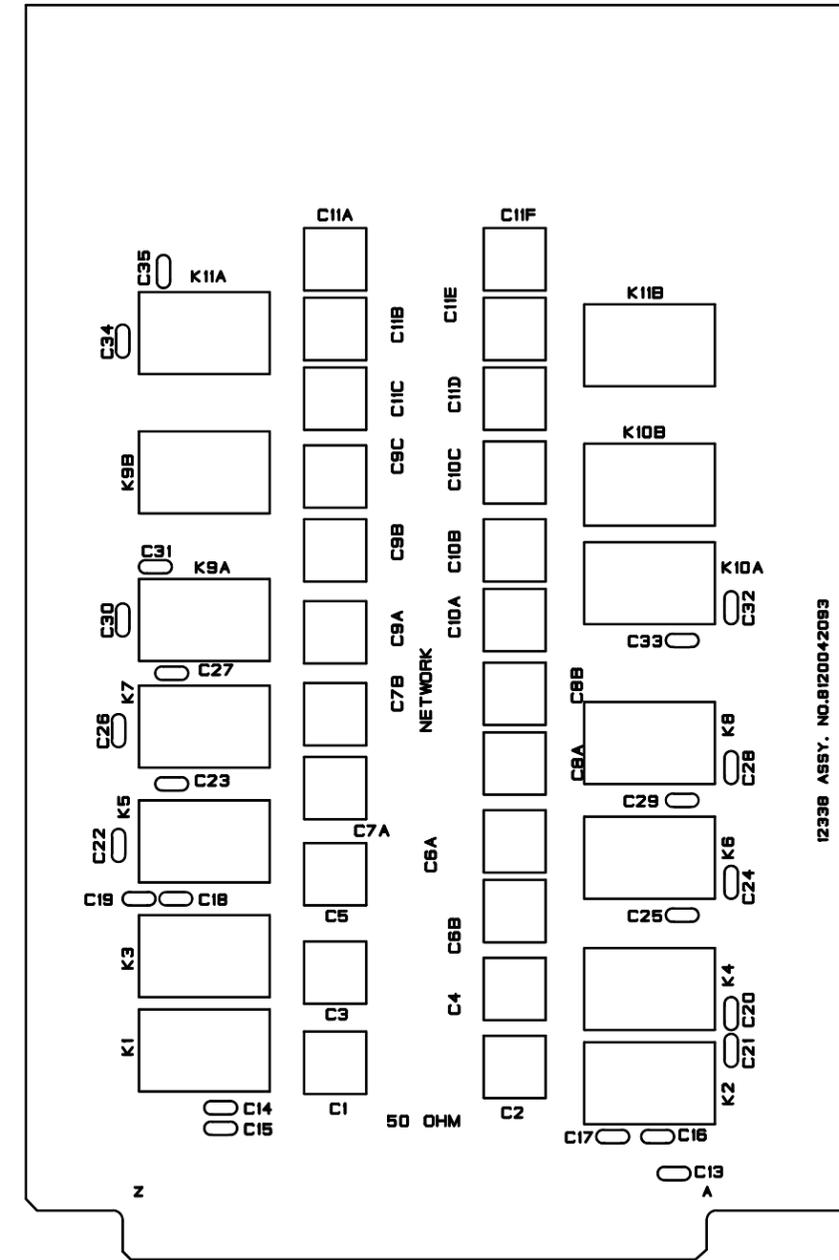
PC Assembly, PC Assembly, Input Capacitor, 1A1A4A2
